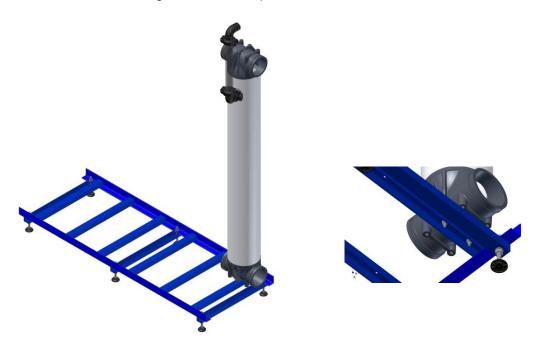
Mounting the modules on the bottom cross braces and connecting the bottom T-pieces of the modules with 6" flexible couplings
